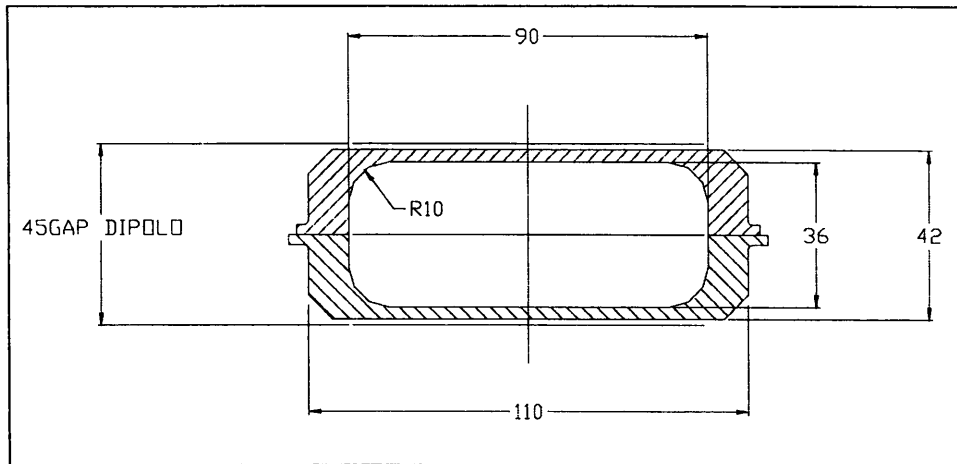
Typical cross section of the vacuum chamber, dimensions in mm.
